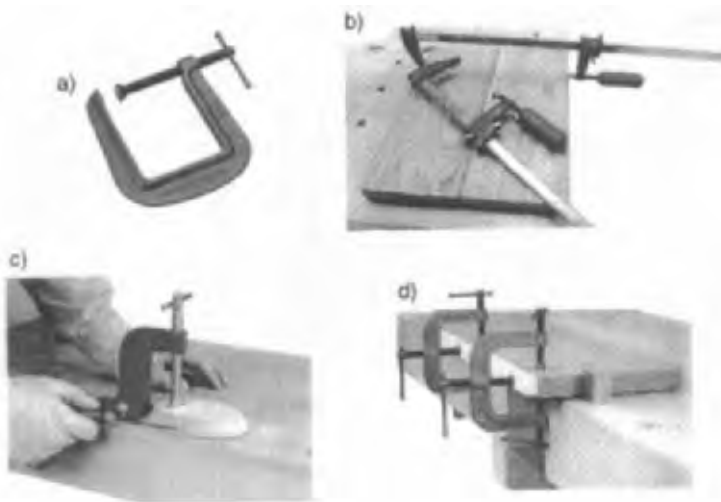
E1 Woodworking clamps: a) C-clamp, b) bar clamp, c) hold-fast clamp, d) edge clamp. (© WMH Tool Group, Inc. All rights reserved.)
